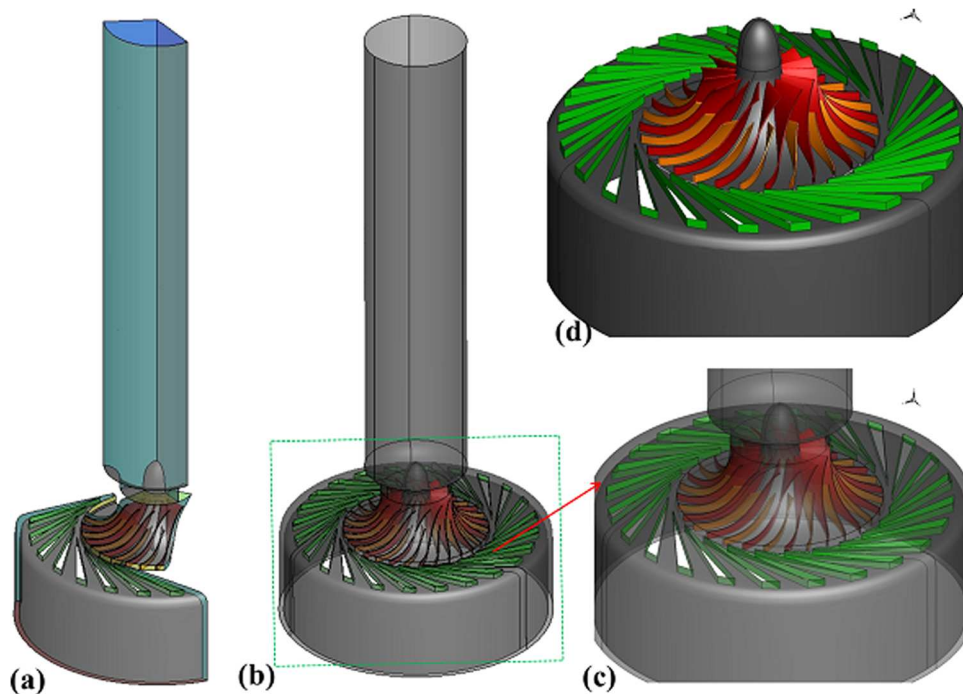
The geometry of simulated parts: (a) 120 deg sector, (b) full domain, (c) enlarged view, and (d) view with casing removal
